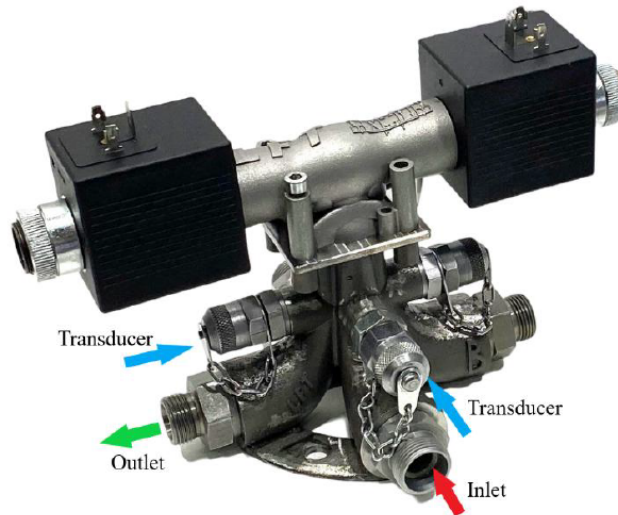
Valve in the testing assembly with magnets, mounting plate (AM) and hydraulic couplings.
